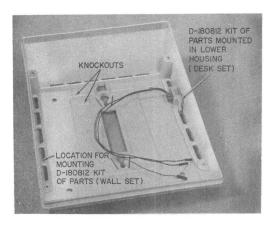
Lower Housing Removed Showing Knockouts for Access by Adjunct Cords and Locations for Mounting D-180812 Kit of Parts
